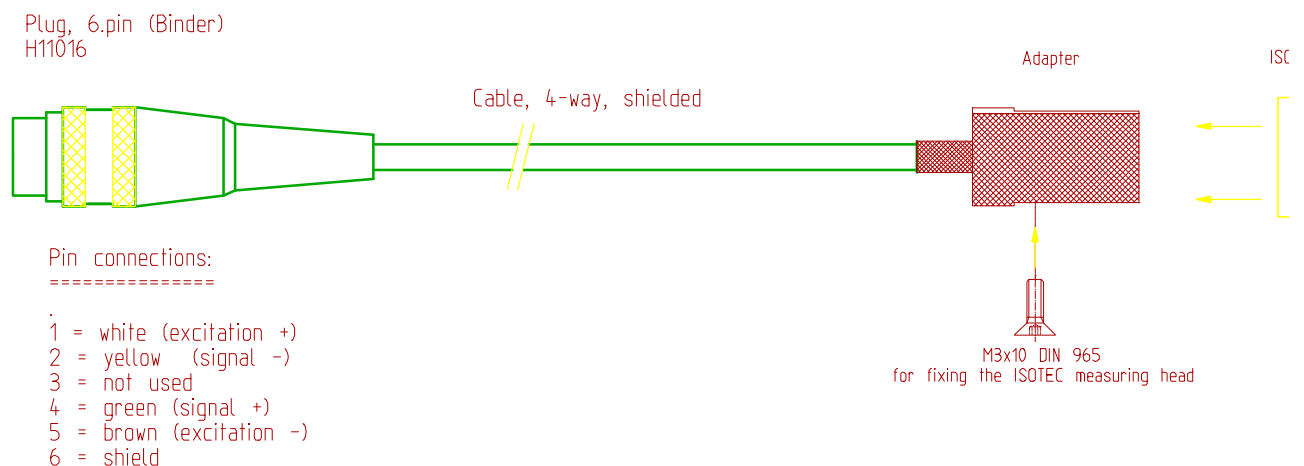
Fitting the ISOTEC measuring head to the adapter of the connecting cable.
